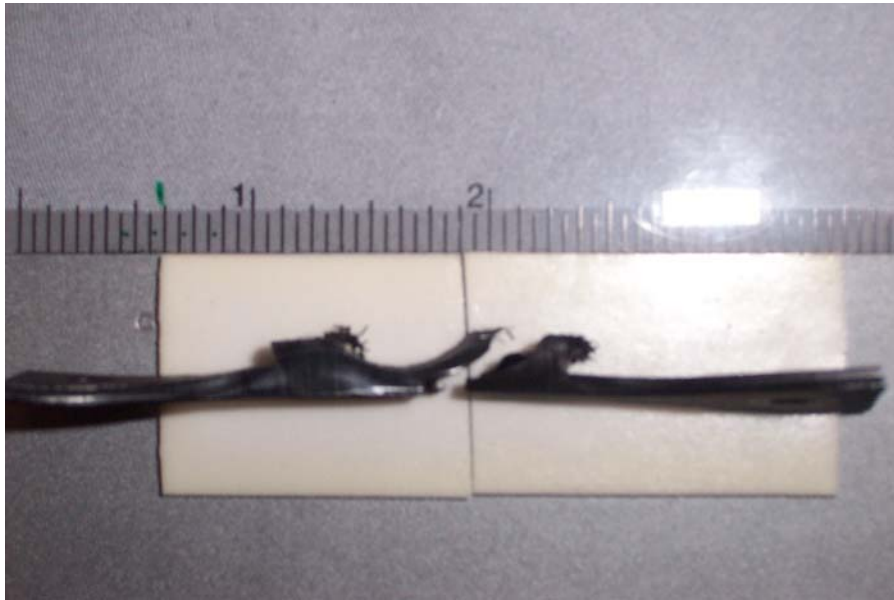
Failure of junction-specimen from pipe P-1
